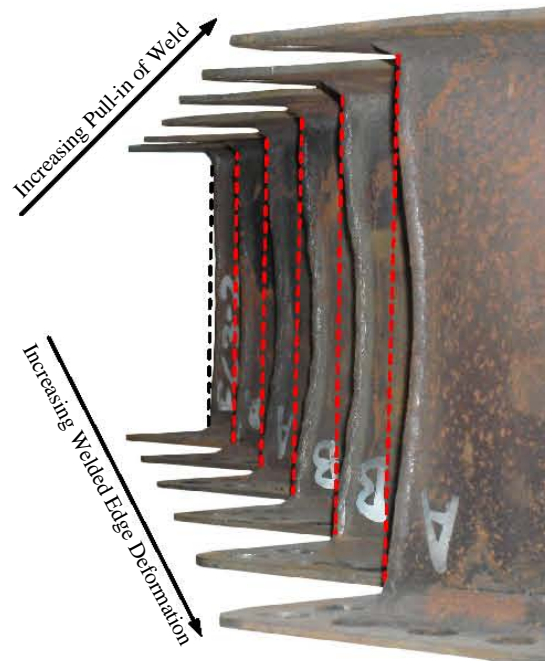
Photograph of Welded Edge Pull-in Observed in 3mm Containers
